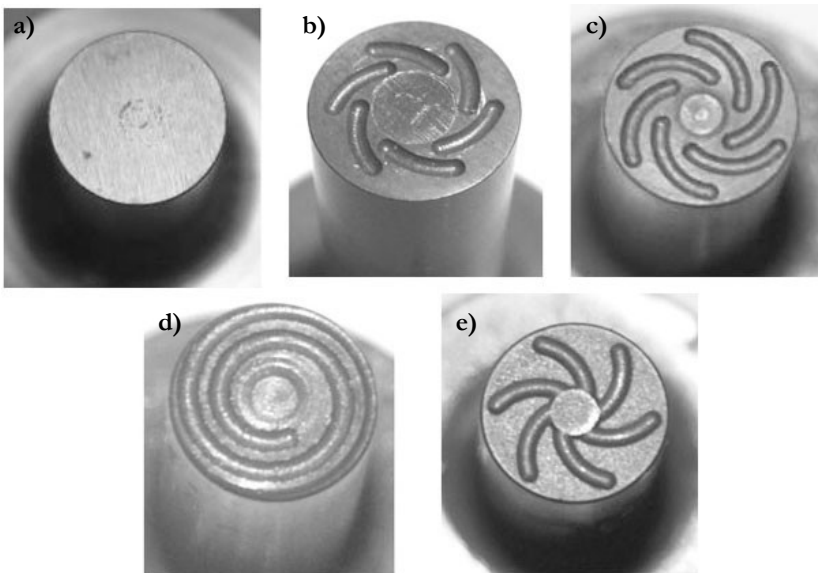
The pinless tools configuration with 10-mm-shoulder diameter used in friction stir spot welding of thin AA6111-T4 sheets: a) flat tool b) short flute wiper tool c) long flute wiper tool d) scroll tool and e) proud wiper tool [23].
